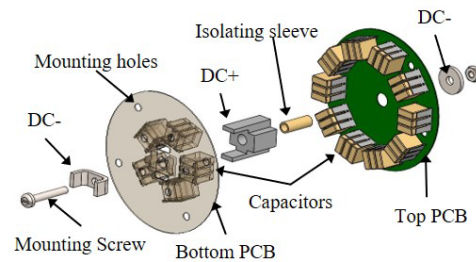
Exploded diagram of the proposed symmetrical (circular) package.
